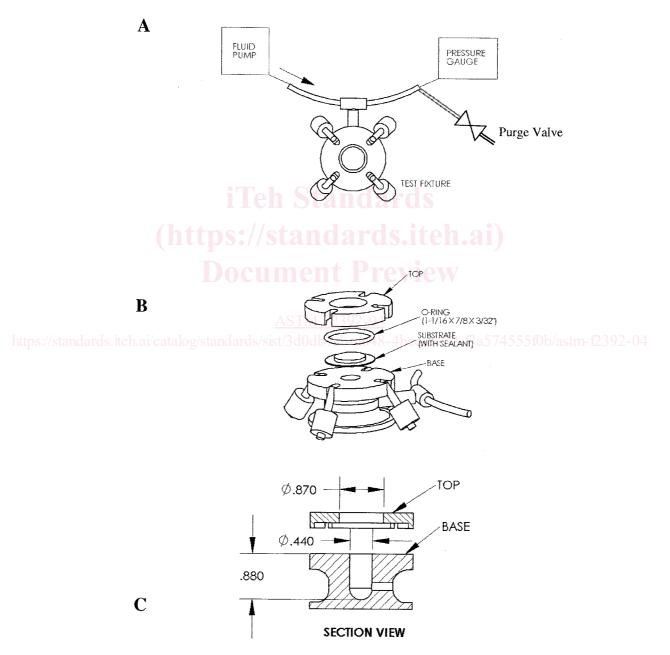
Burst Test System (A), with an Exploded View of the Assembled Test Fixture (B), and the Test Fixture Cross Sectional View (in.) (C)
